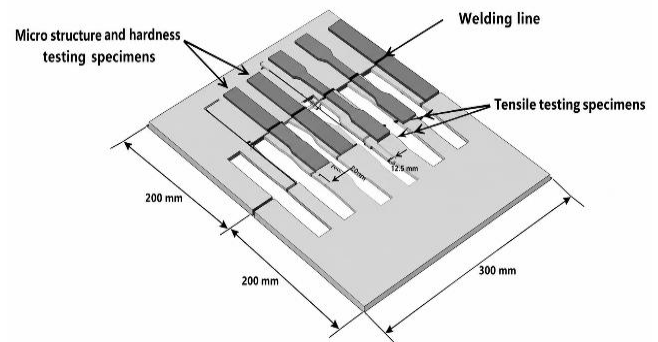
Schematic illustration of the friction stir welding (FSW) and the traverse testing specimens
